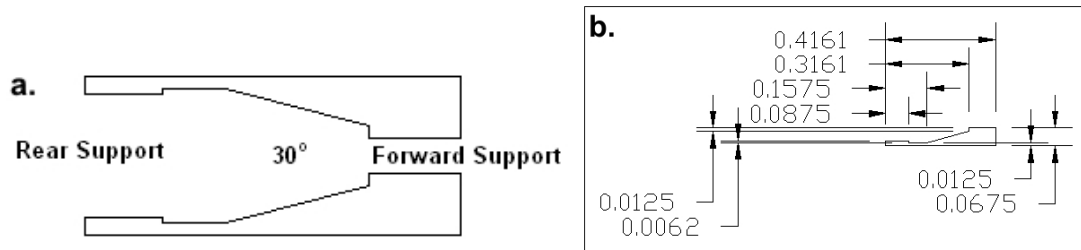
(a.) Mirrored and dimensionless representation of the custom PTFE fiber-optic coupling ferrules, and (b.) the dimensioned tool path utilized for CNC fabrication.
